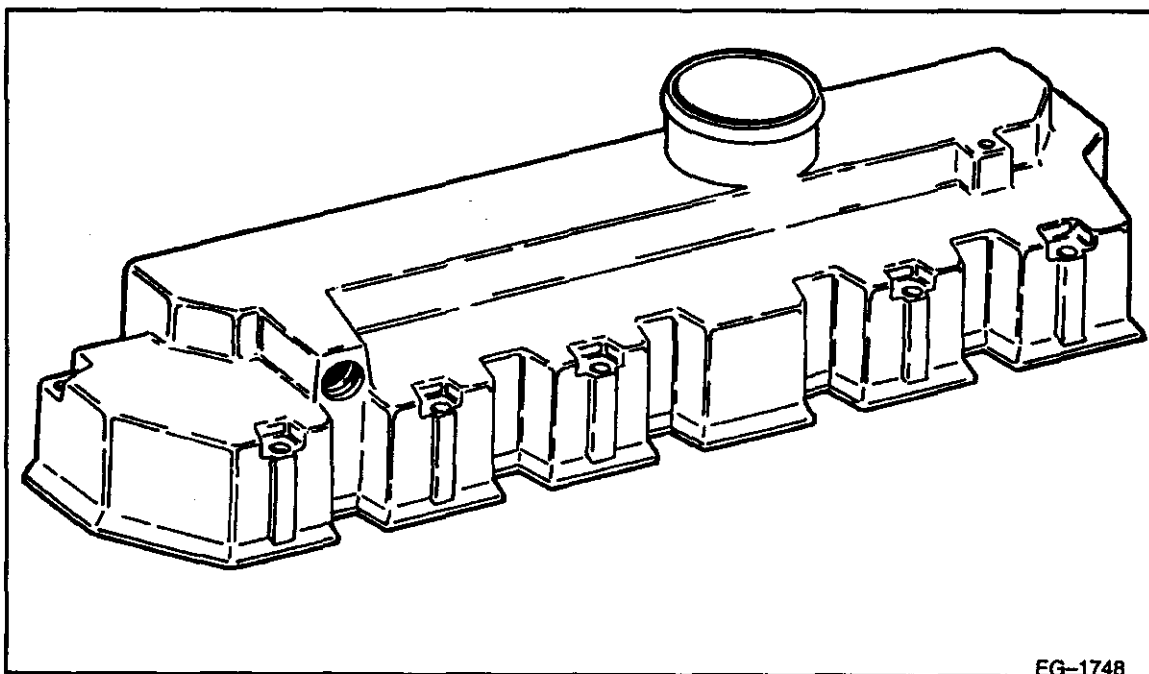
Valve Cover/Intake Manifold Assembly.
